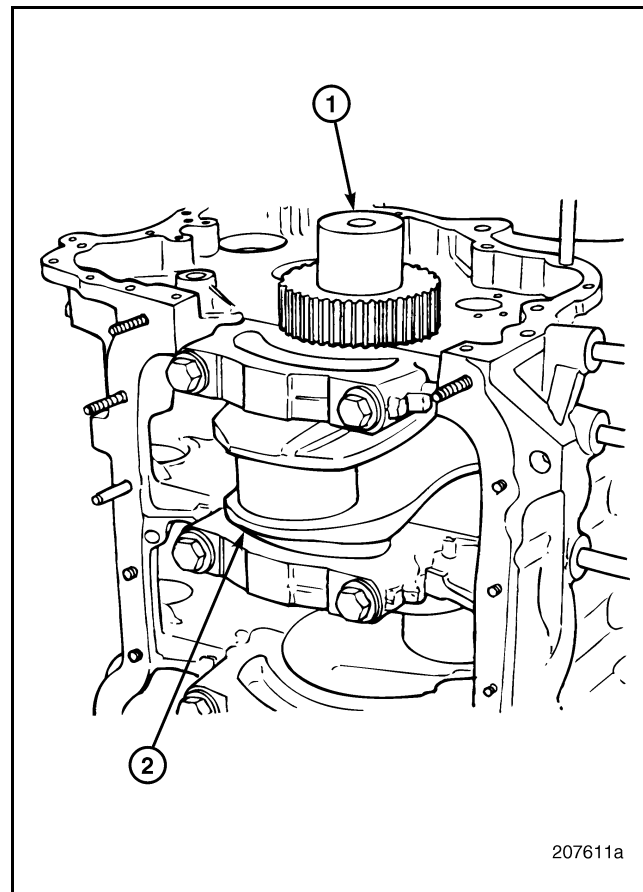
No. 1 Cylinder (Crankshaft at BDC)
